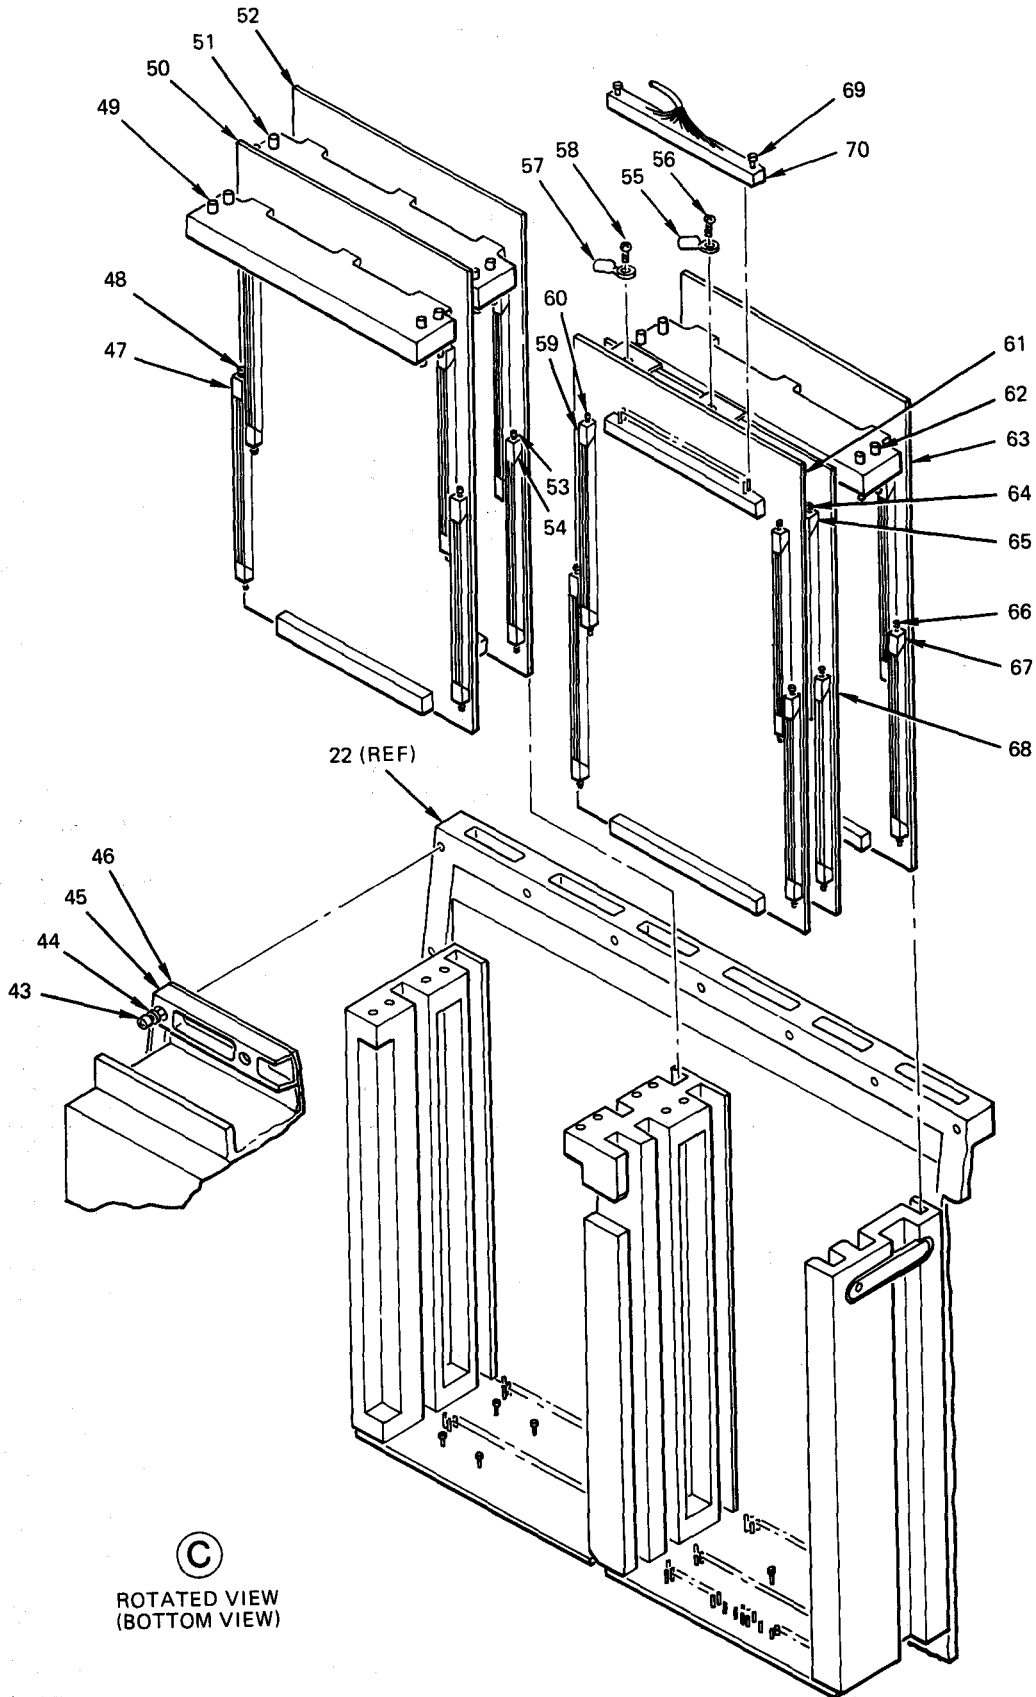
Power Supply Exploded View (Sheet 3 of 3)
